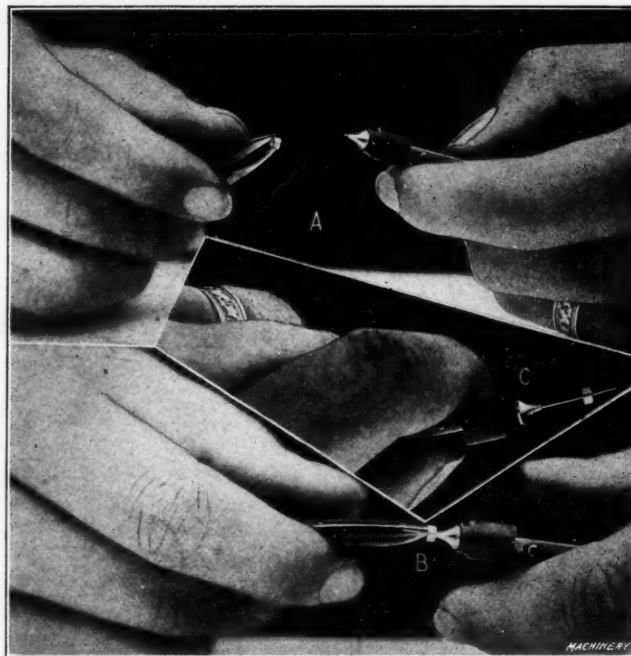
Gaging the Holes in Jewels by Means of a Needle Gage
